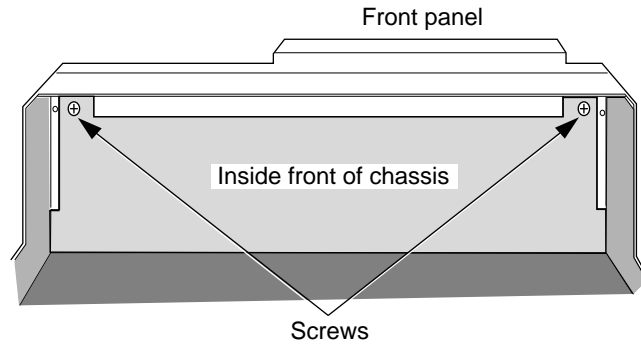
Front Panel Screws in the 4-Slot Chassis
